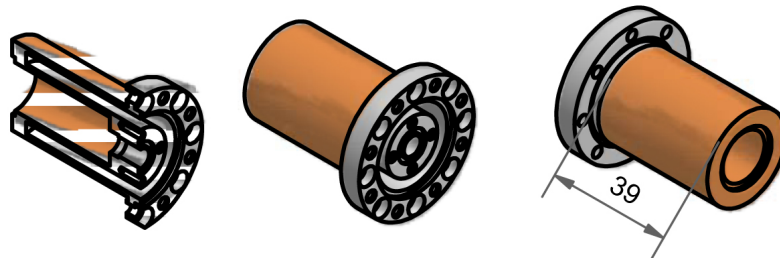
Drawings of the heat exchanger made from a copper-stainless steel friction-weld, without the sintered silver powder and the microwave guide.
